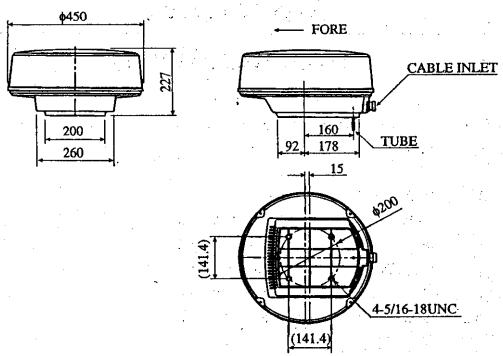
SCANNER MOUNTING DIMENSIONS
